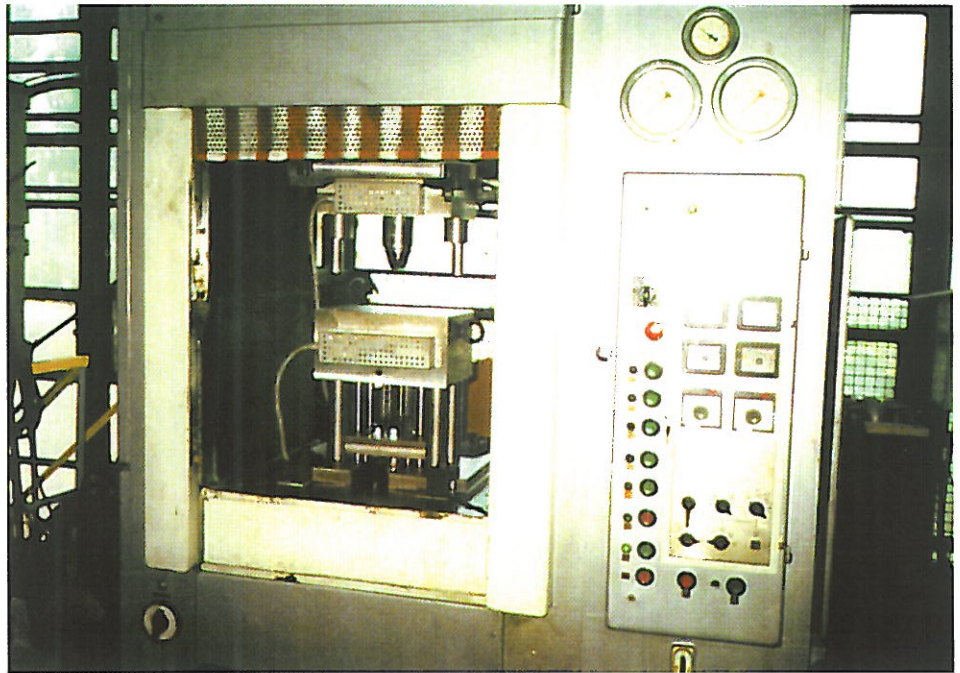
A die for squeeze casting of composite pistons for I.C. engines, placed on the table of hydraulic press.
